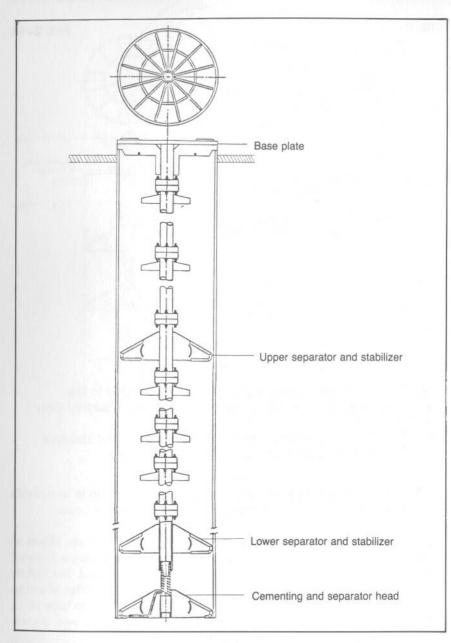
When all required separator-and-stabilizer assemblies are in place within the leg, the base plate is welded to the top. (*Courtesy Gray Tool Co.*)
